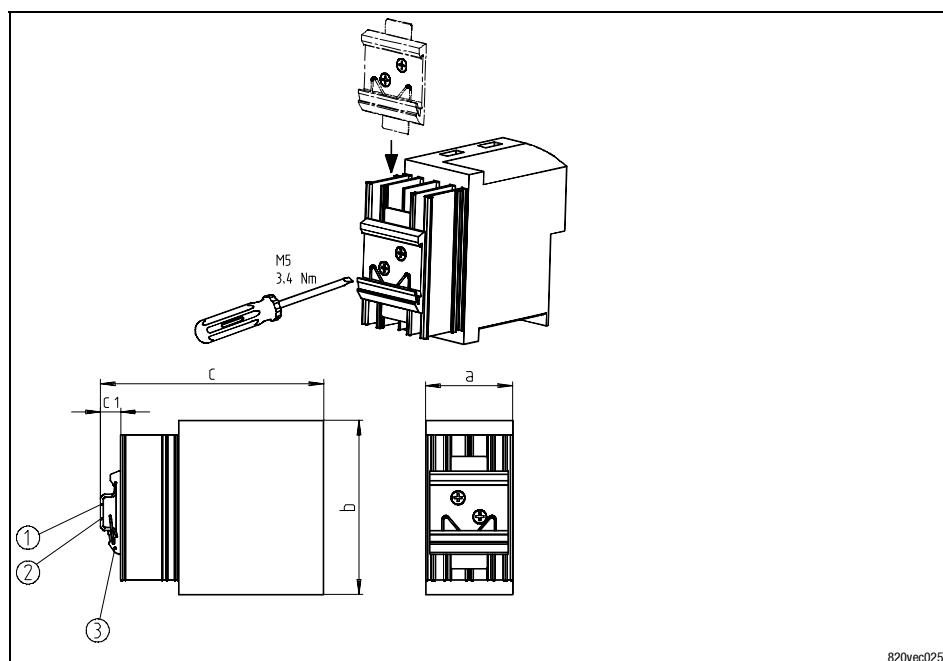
DIN rail mounting 0.25 ... 2.2 kW
